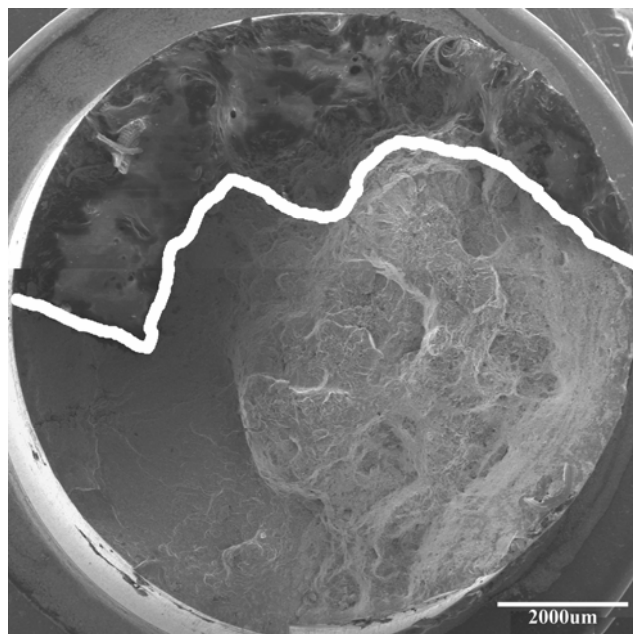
Fracture Regions Divided by an Inserted Line on a Stress Control Cylinder with Disc Specimen, $S_a = 588$ MPa (Specimen E7)
